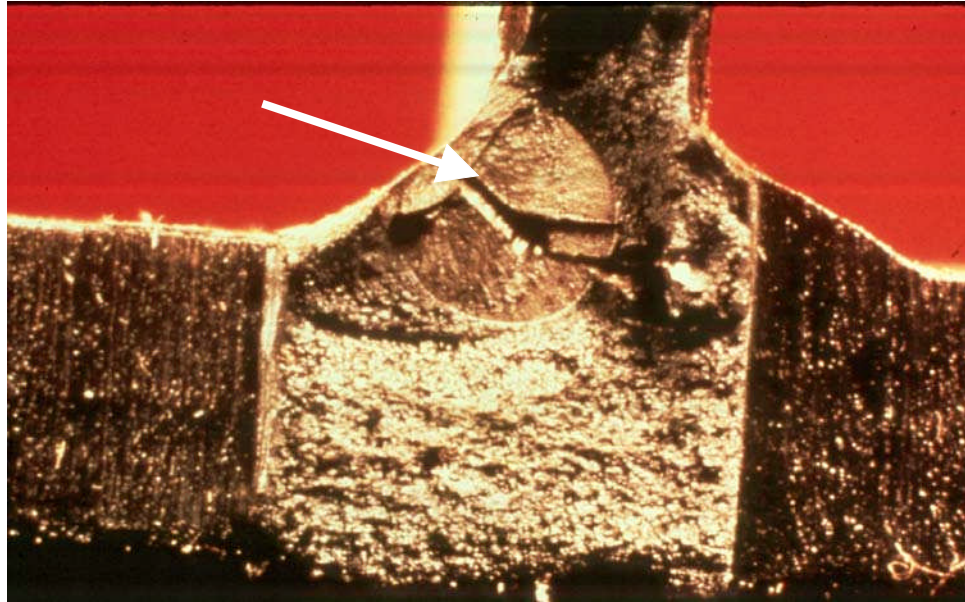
Web to Flange Crack due to Fillet Weld Slag Inclusion
